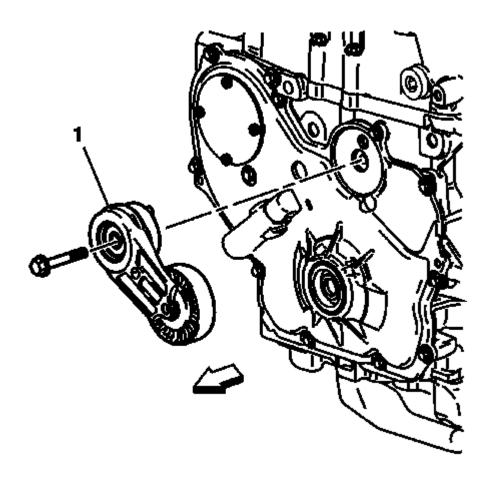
Accessory Drive Belt Tensioner And Bolt Courtesy of GENERAL MOTORS COMPANY
